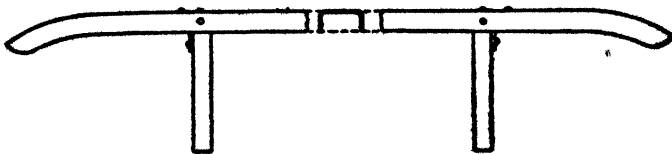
MOTOR TRUCK FRONT BUMPER.
